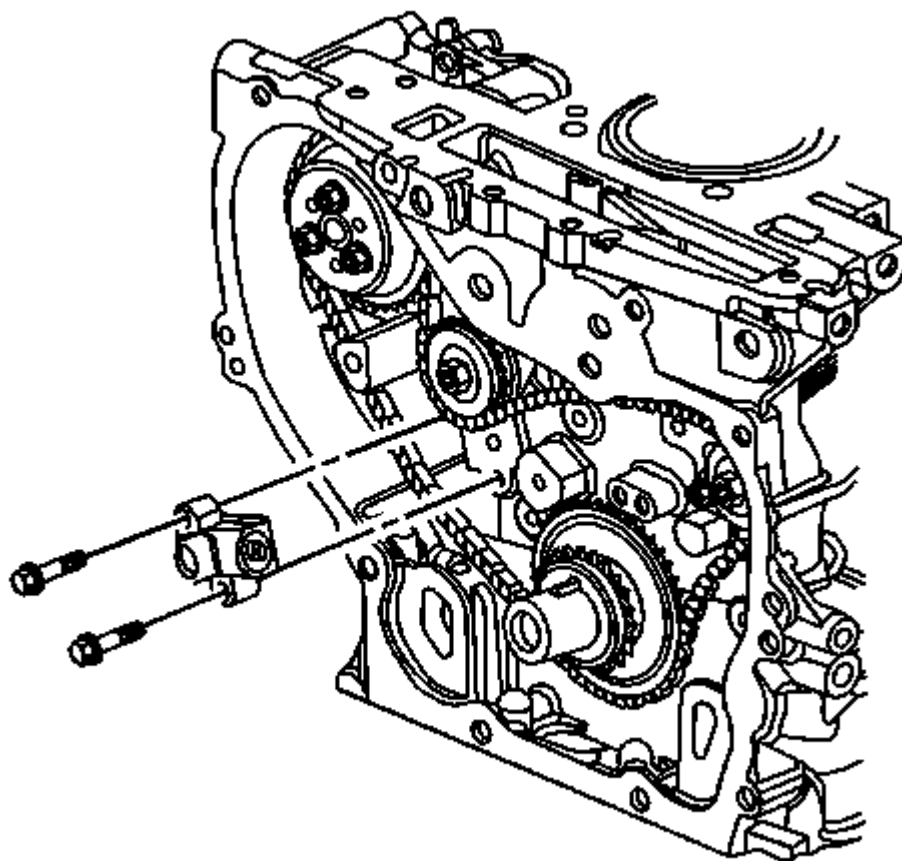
View Of Balance Shaft Drive Chain Tensioner
